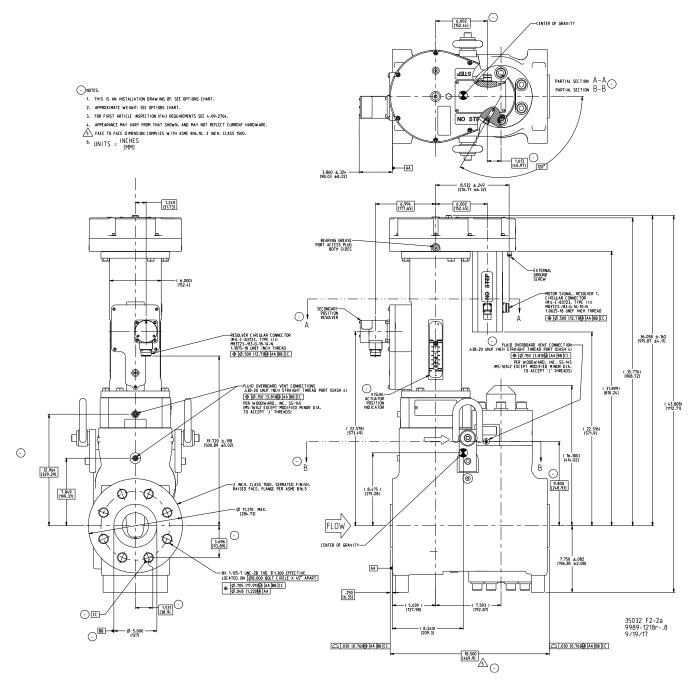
Outline Drawing of 3" ELMV-HD
